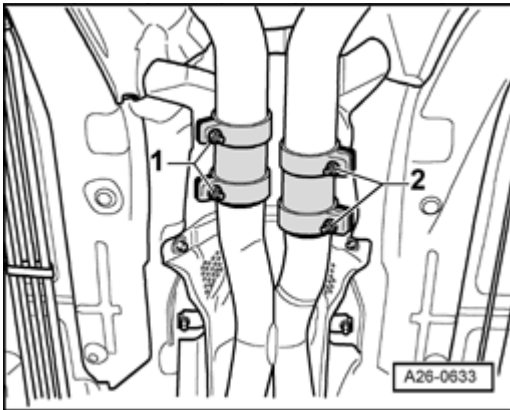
Loosening Double Clamp And Sliding It Toward Front
